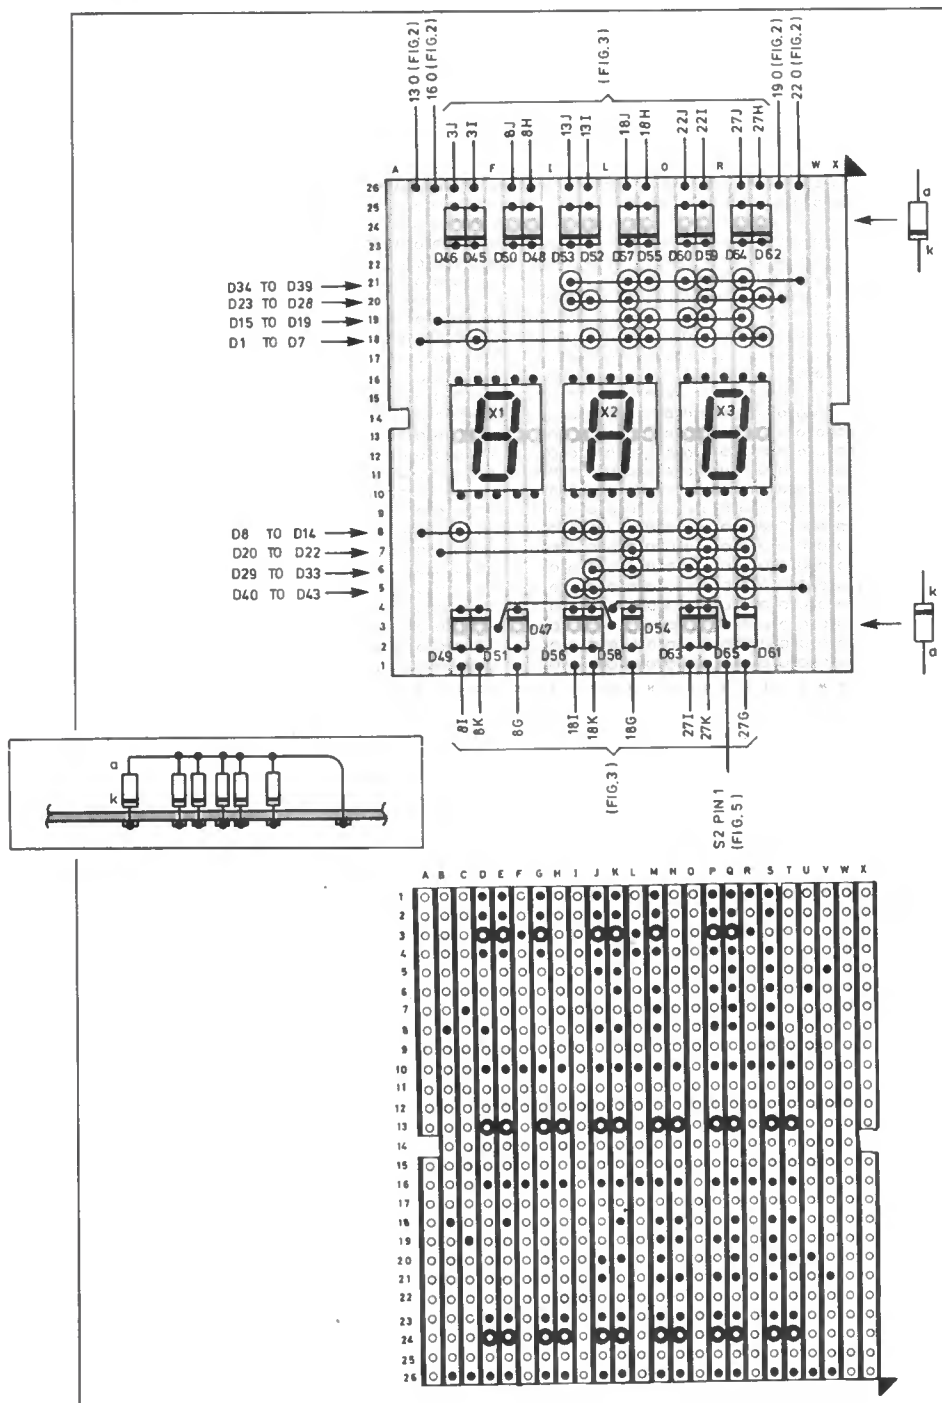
Topside component layout and underside stripboard track cuts and solder joints for the Display/Matrix board. The insert shows an example of how the vertically mounted diodes should be connected.
